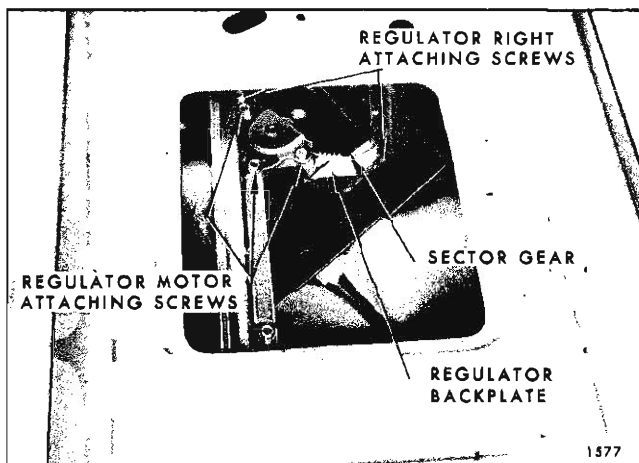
F24—Tail Gate Window Regulator Motor Removal
